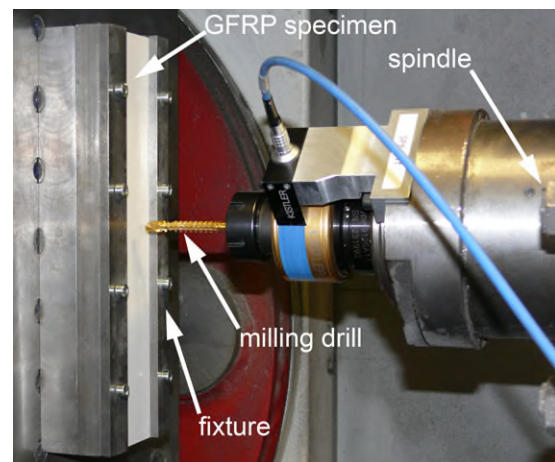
Experimental setup for the three-axial processes showing the spindle with the tool as well as the clamped specimen.
